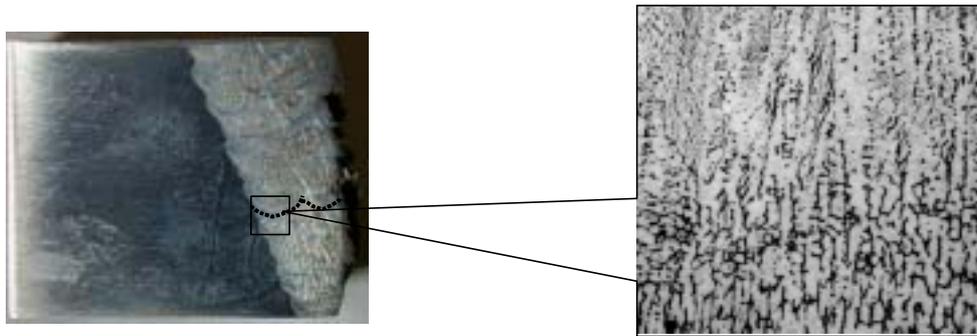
Microscopy showing solidified weld structure in SJF specimen.
